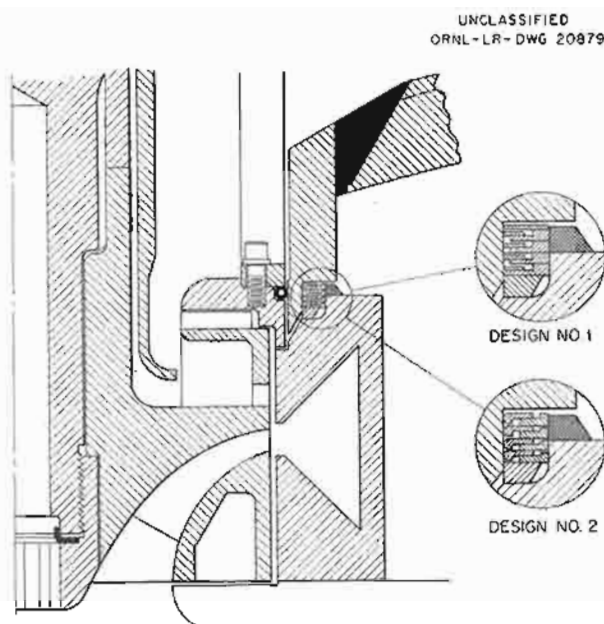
Partial Cross Section of Sodium Pump Assembly Showing Proposed Multiple-Ring Seal.
